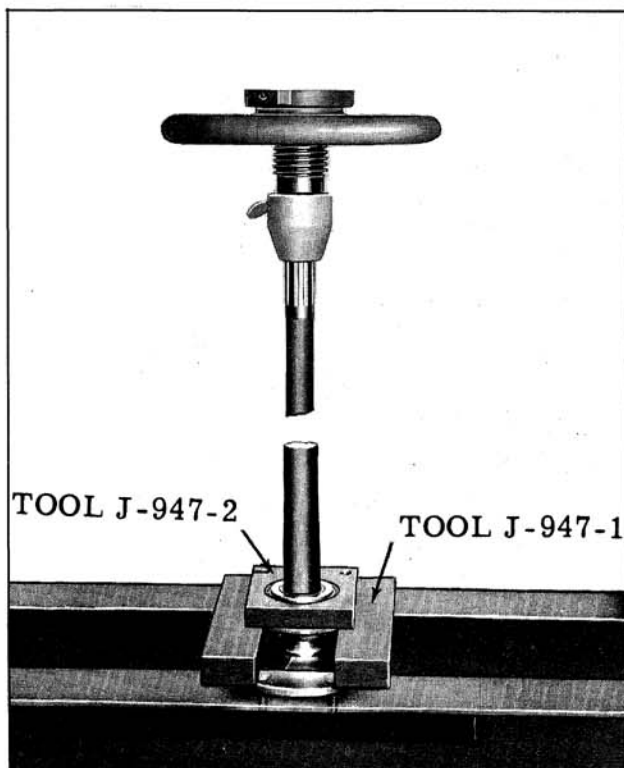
Removing Axle Bearing (54 through 86 Series)
